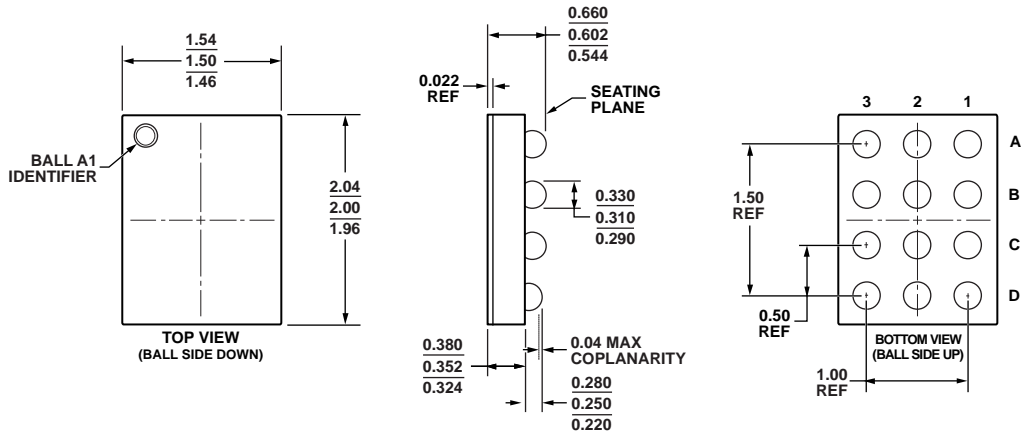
12-Ball Wafer Level Chip Scale Package [WLCSP]
